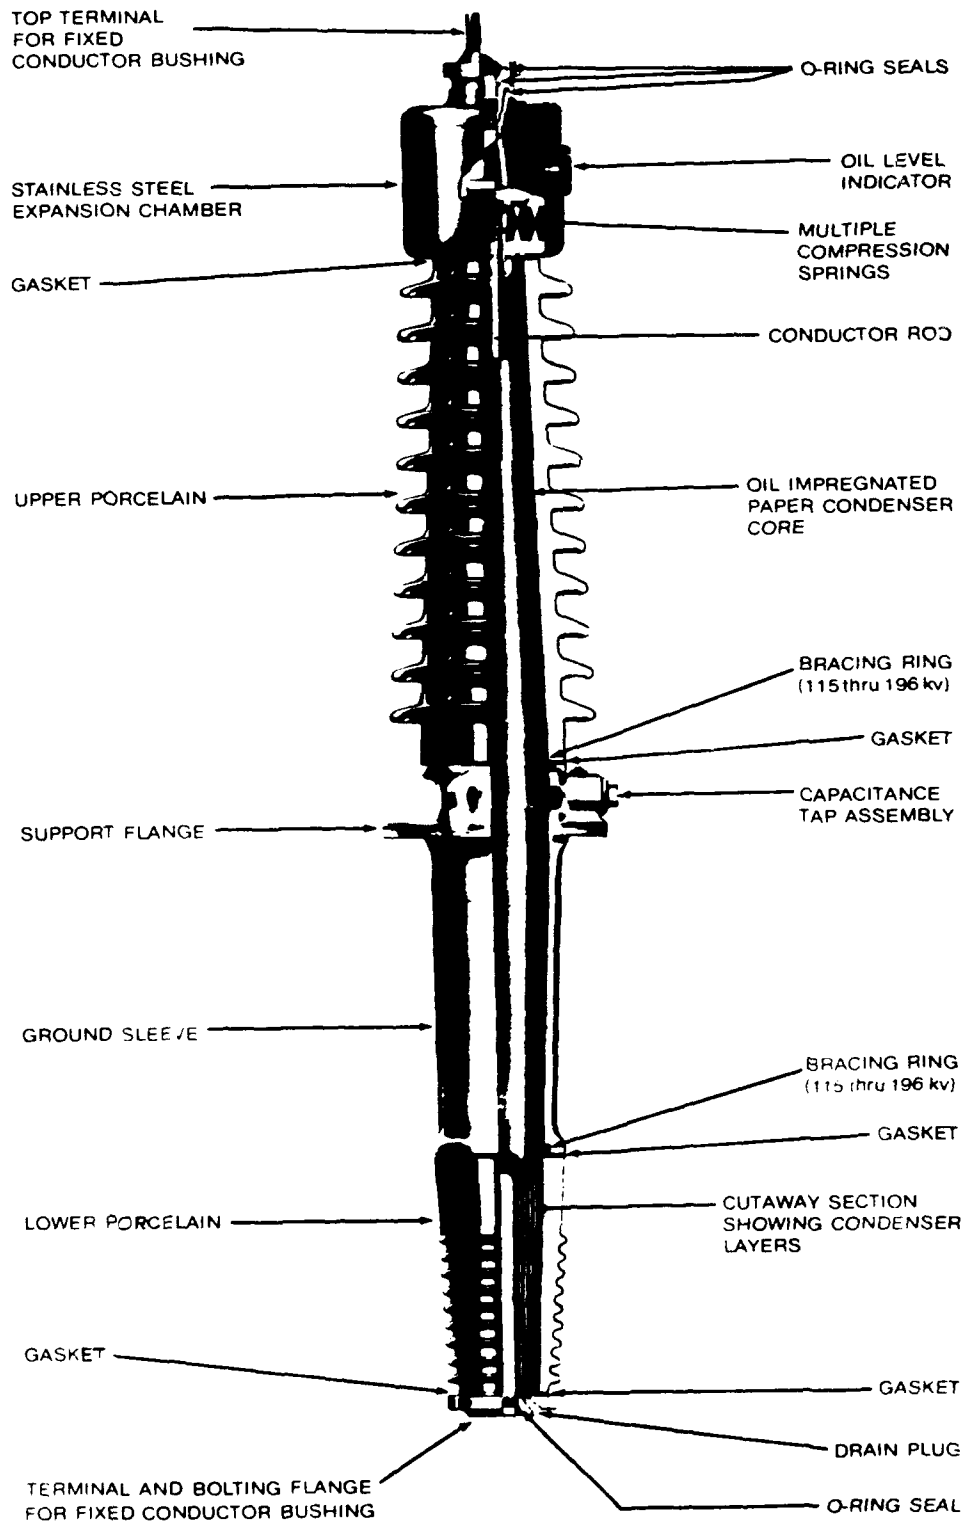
Power-apparatus bushing cutaway identifying principal components.
